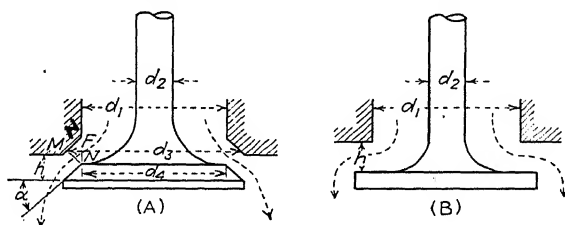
(A) Conventional conical-seated valve. (B) Flat-seated valve.
